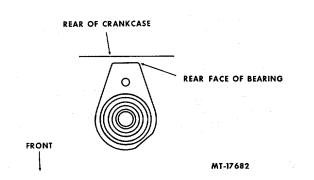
Installation of Oil Pump and Distributor Shaft Bearing in Crankcase
